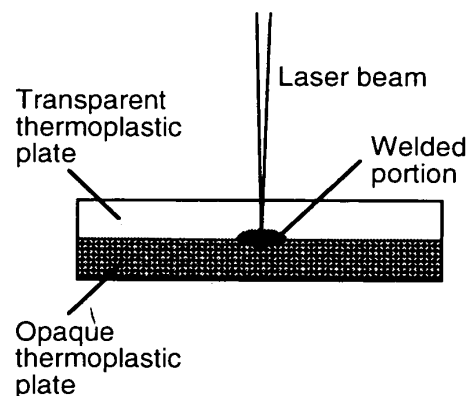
Laser Lap welding of transparent and opaque thermoplastic plates
